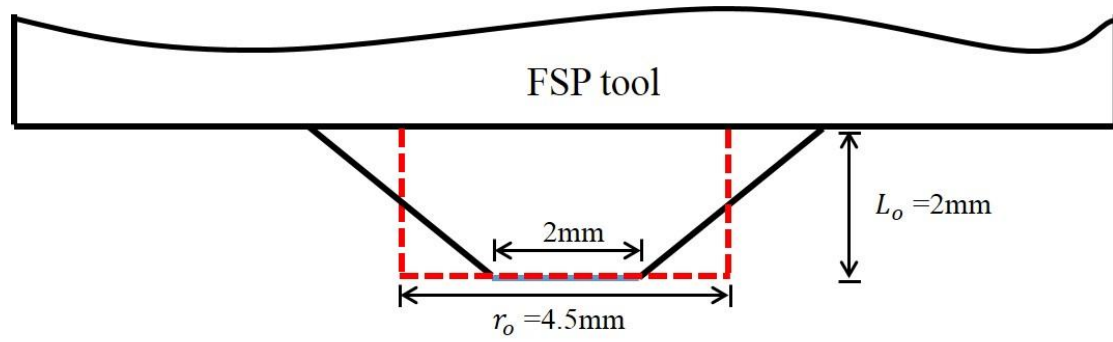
Schematic drawing showing the dimension of FSP tool.
